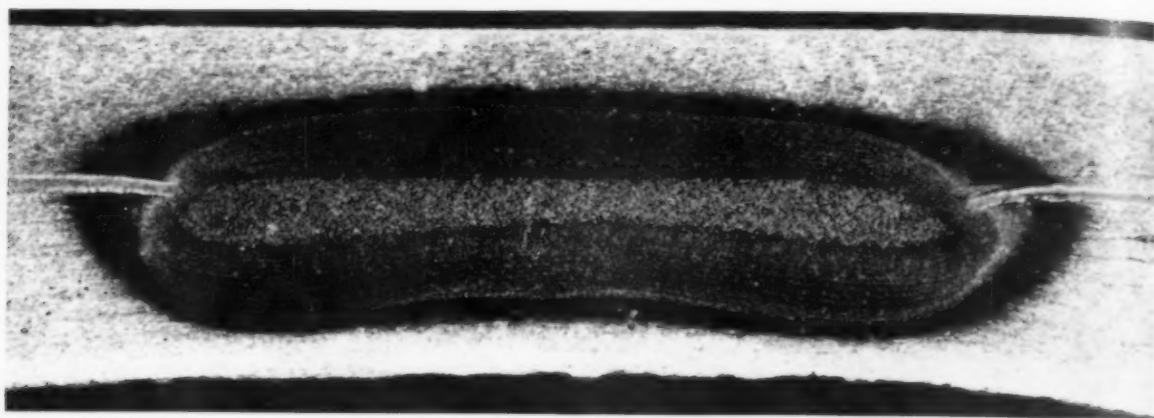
Spot-Weld in 24S-T Alclad Sheet Made With Alternating Current. Note "annular rings" in outer zone of slug. Magnified 12 diameters
